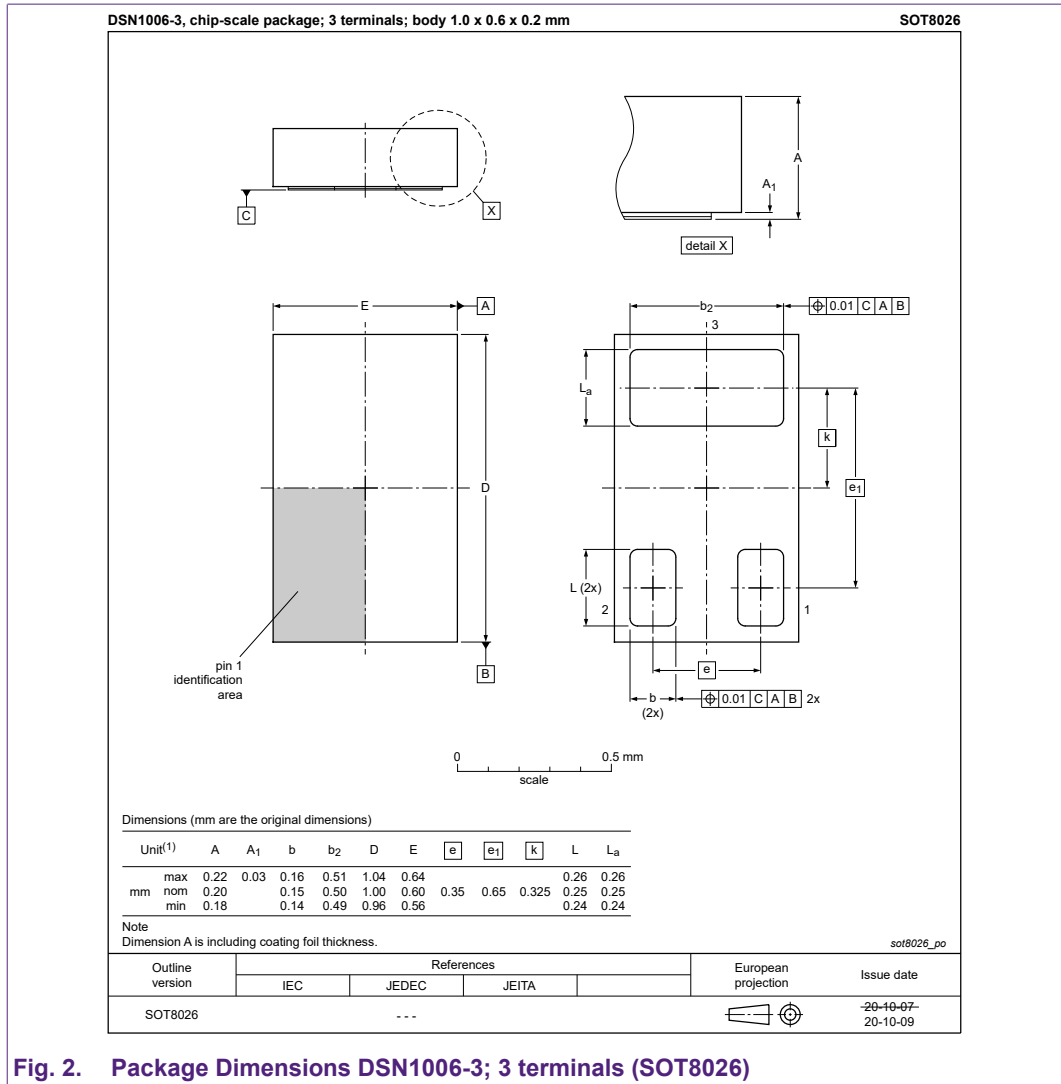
Package Dimensions DSN1006-3; 3 terminals (SOT8026)
